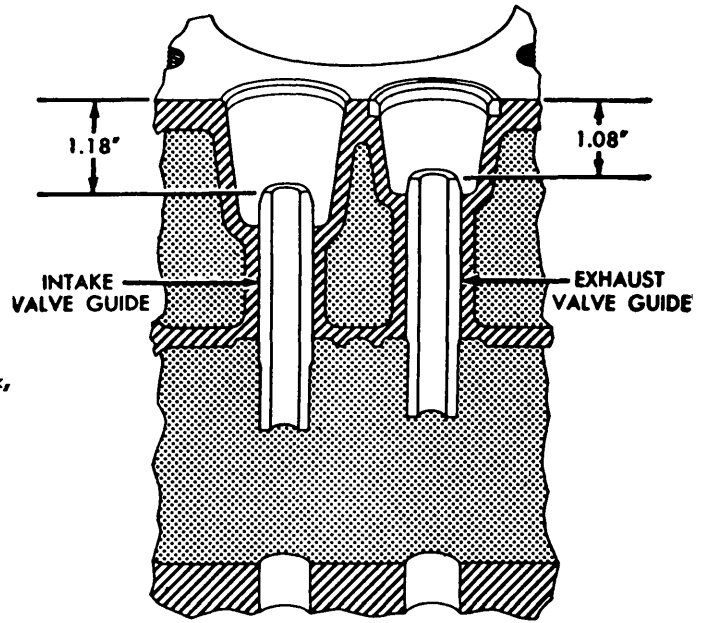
Valve guide depth in cylinder block, 1948-51 Ford Six
